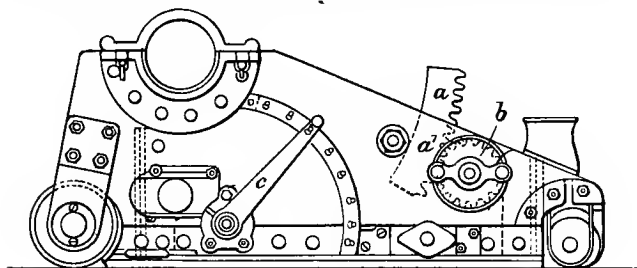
IRON CARRIAGE FOR 7-INCH GUN.
